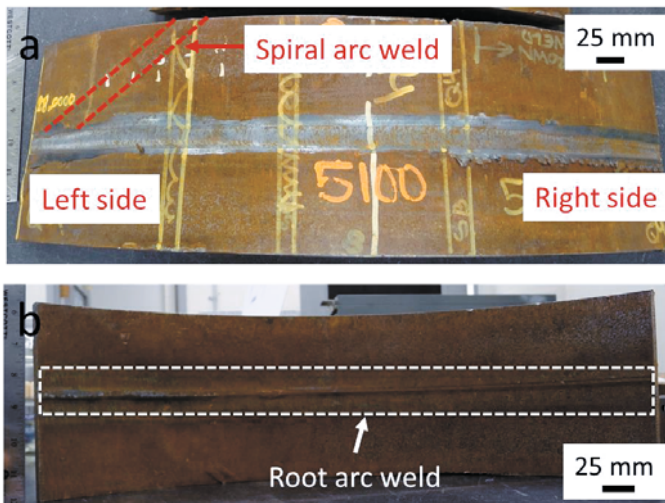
(a) Top view image showing FSW on line pipe steel. Spiral arc weld (red dot lines) is shown. (b) Inner surface view showing the root arc weld on line pipe steel (white color dotted box).
